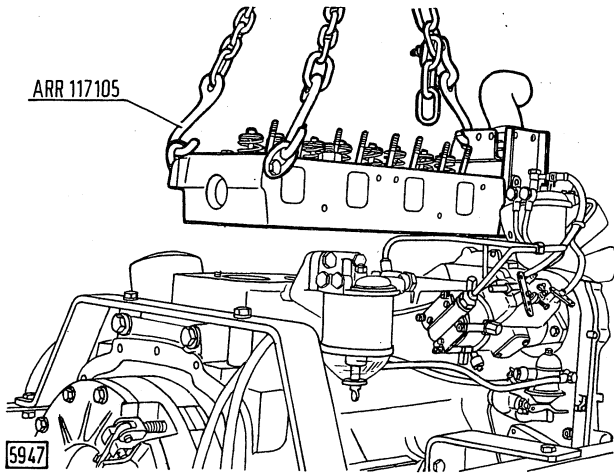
Removing cylinder head from engine installed on turnover stand.
